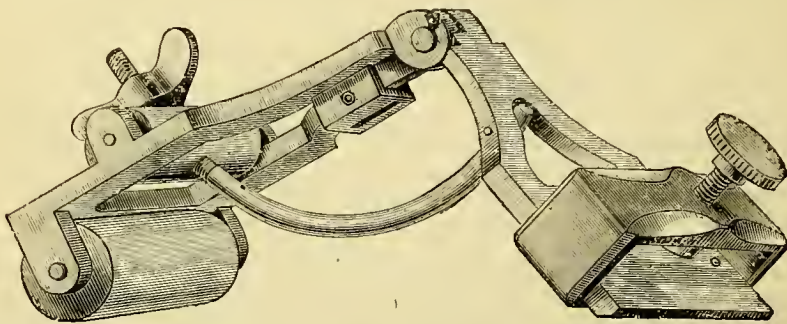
NEW TOOL-HOLDER—ADJUSTABLE TO ANY GRINDSTONE.
